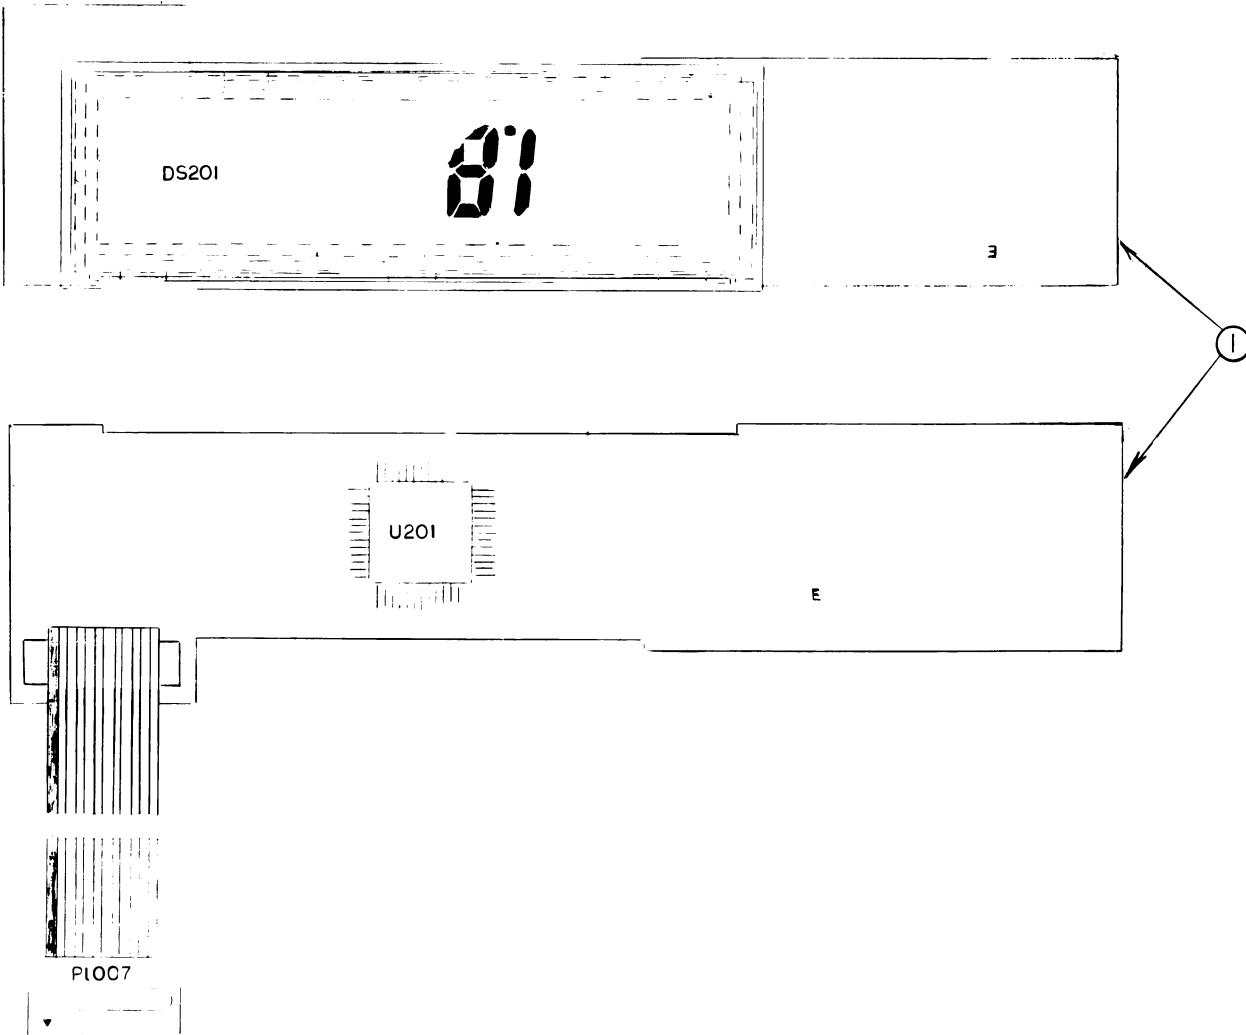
Display Board, Component Location Drawing, Dwg. No. 580-110
